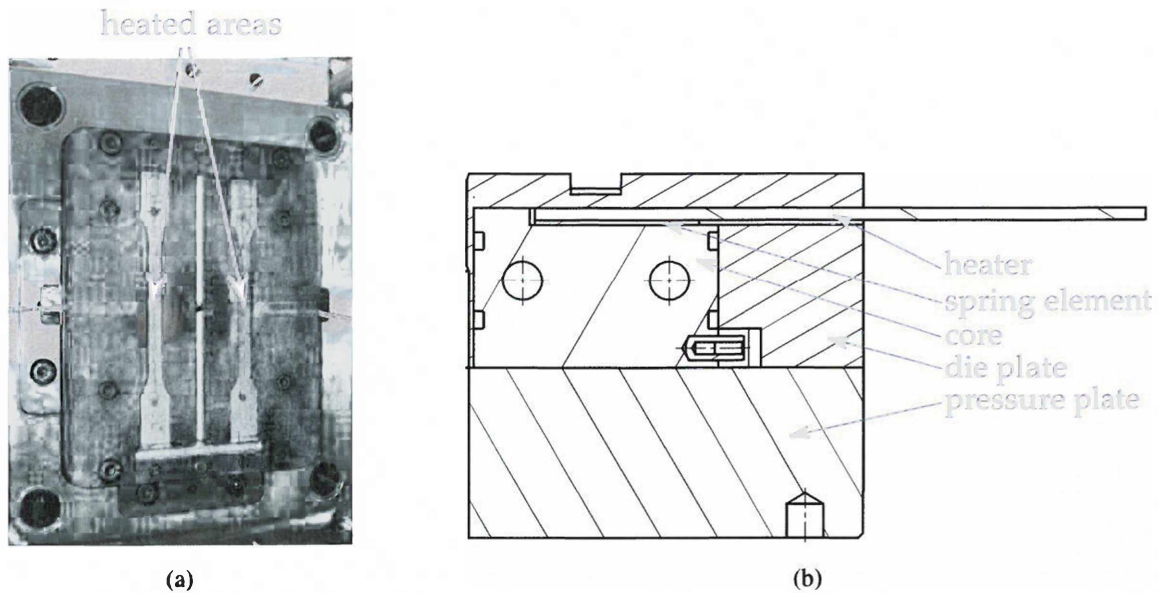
Mold used for the injection molding DOE. (a) photo of the cavities, (b) cut through the mold.
